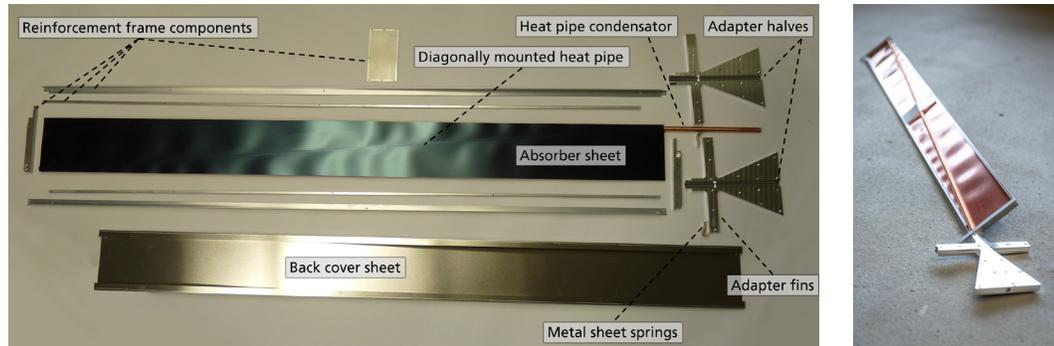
Left: Slat components. Right: Back surface of a slat with diagonally mounted heat pipe and triangular adapter in the foreground (back cover sheet removed).
